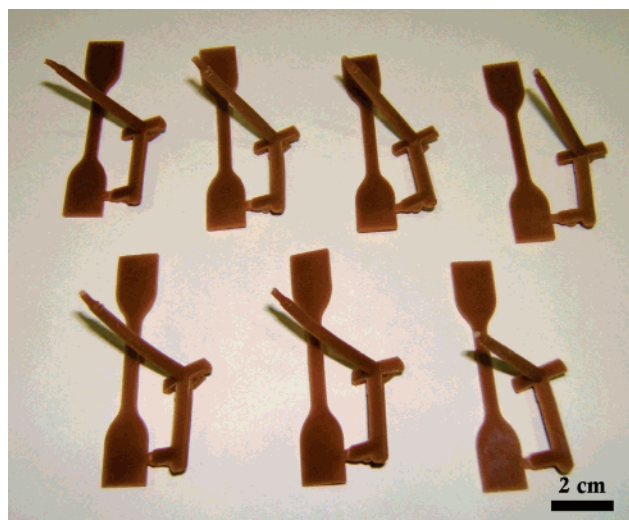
Photograph of the injection-molded dumbbell-shaped TPE samples.
